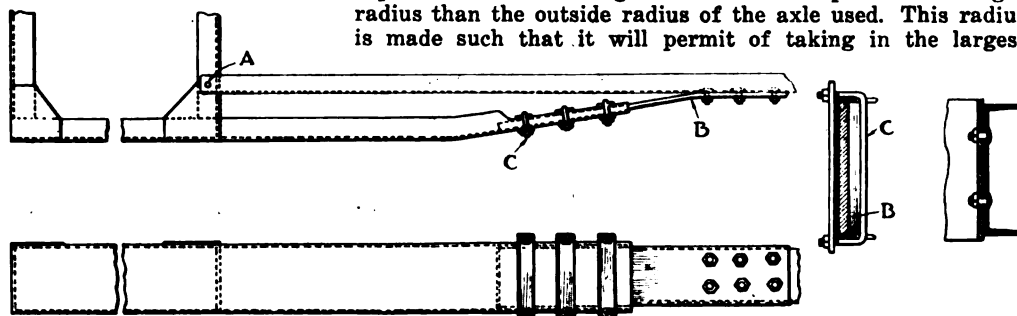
Frame extension. A, bolt joining rear end of car frame to cross member of extension; B, extension bar; C, U-bolt
